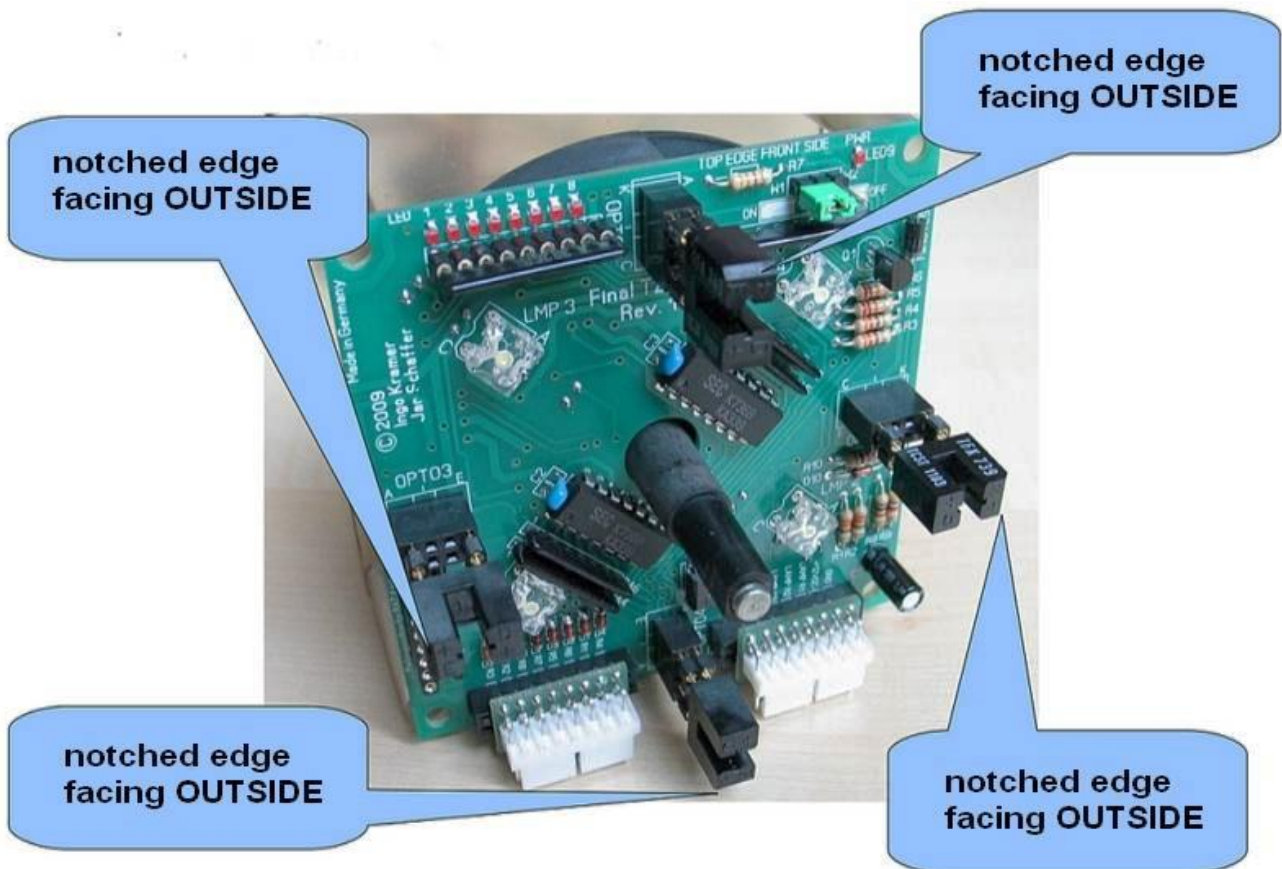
The 4 optos should be installed as shown with the notch facing out (NOTE: the board is a prototype board, in the final version, the ICs and LEDs are socketed)
